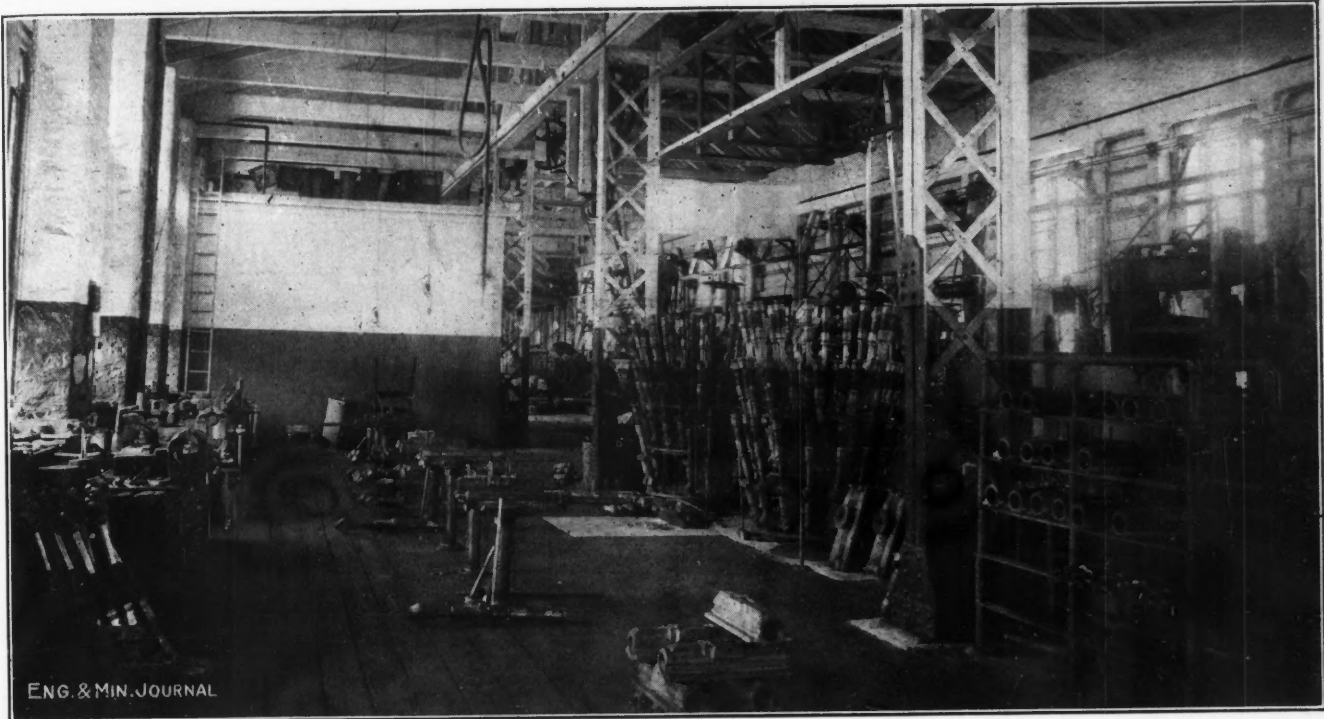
ROCK-DRILL DEPARTMENT OF THE CALUMET & HECLA
